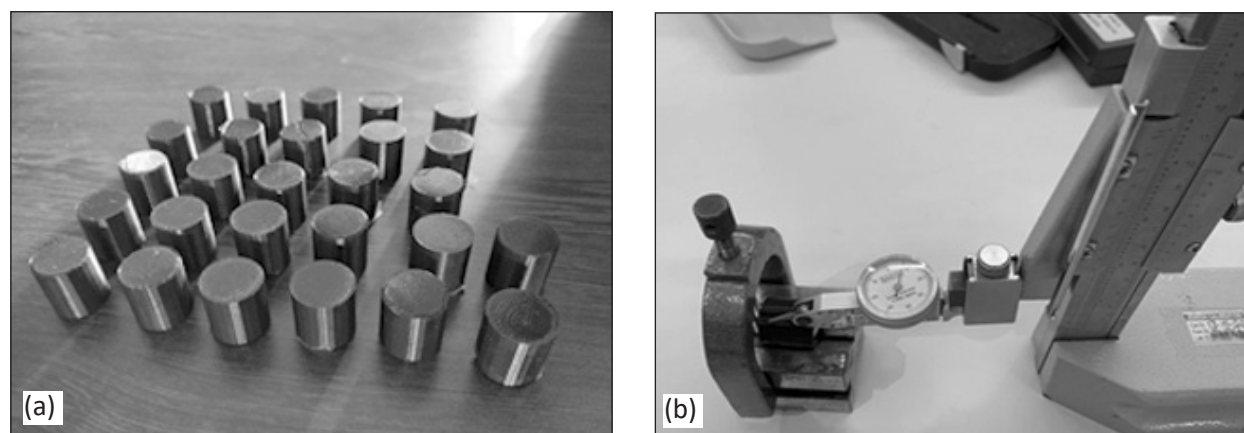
(a). Printed components (b). Roundness inspection set up.
